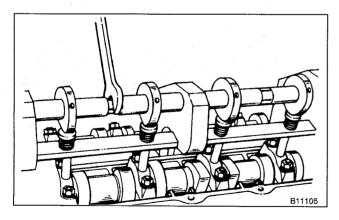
Special BMW tool no. 11 3 260. Tool mounting bolts (arrows) thread into spark plug holes.
